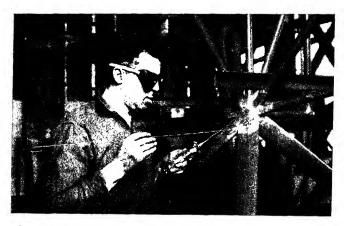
Oxy-acetylene welding an airplane fuselage—a typical production welding operation.
